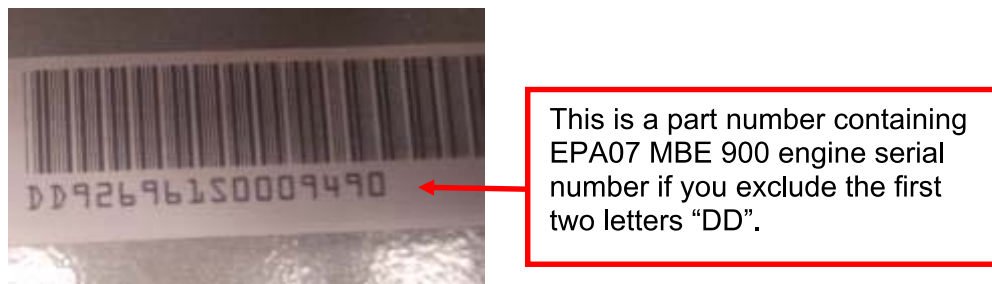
EPA07 MBE 900 serial number - top front of engine rocker cover
